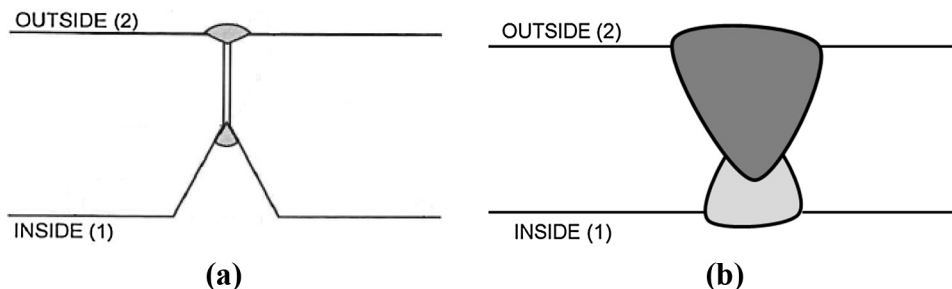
(a) Edge preparation of the welding sequence with inside/outside tack welds milled out (b) weld run sequence.
